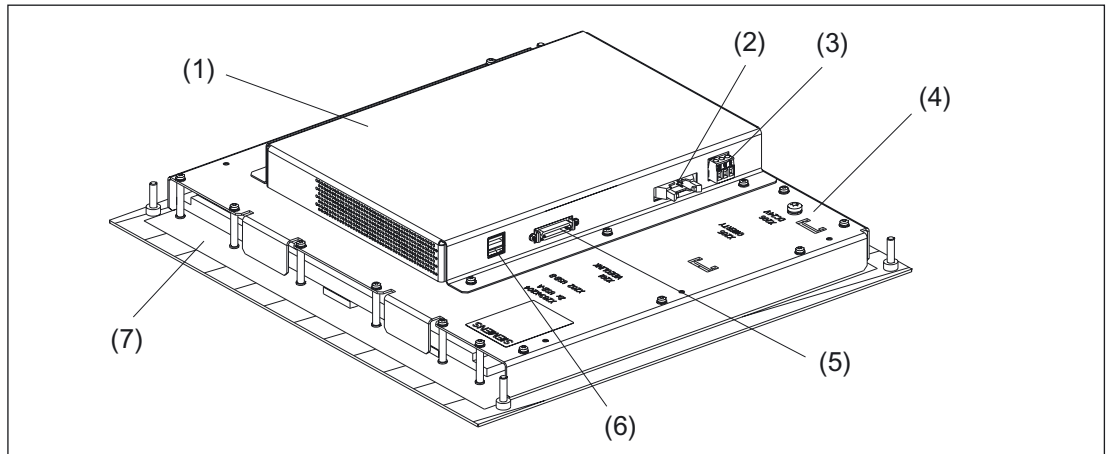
Rear view of the operator panel front with premounted videolink receiver
